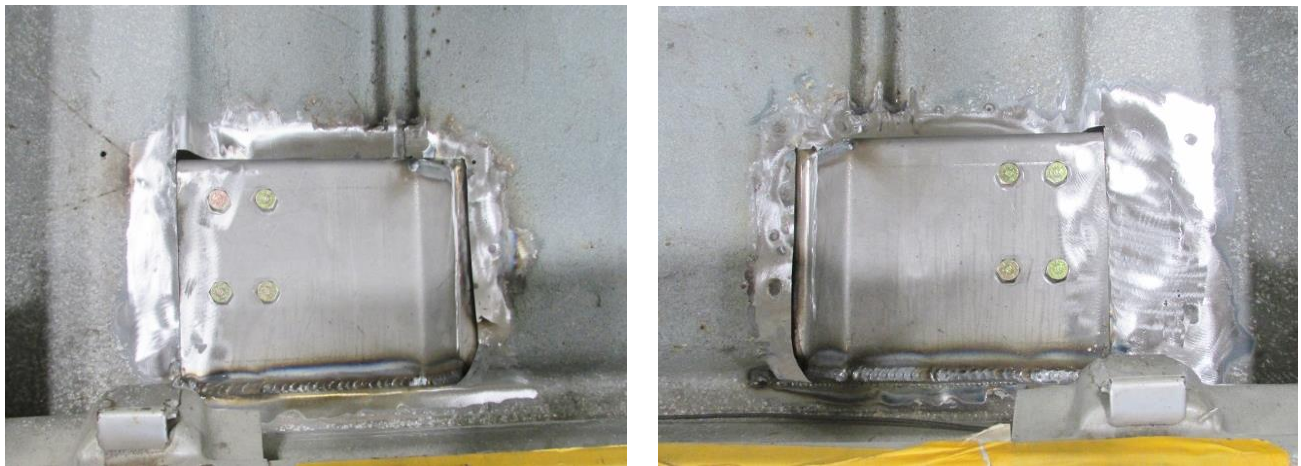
Finish Weld & Grind Rear Mounts
